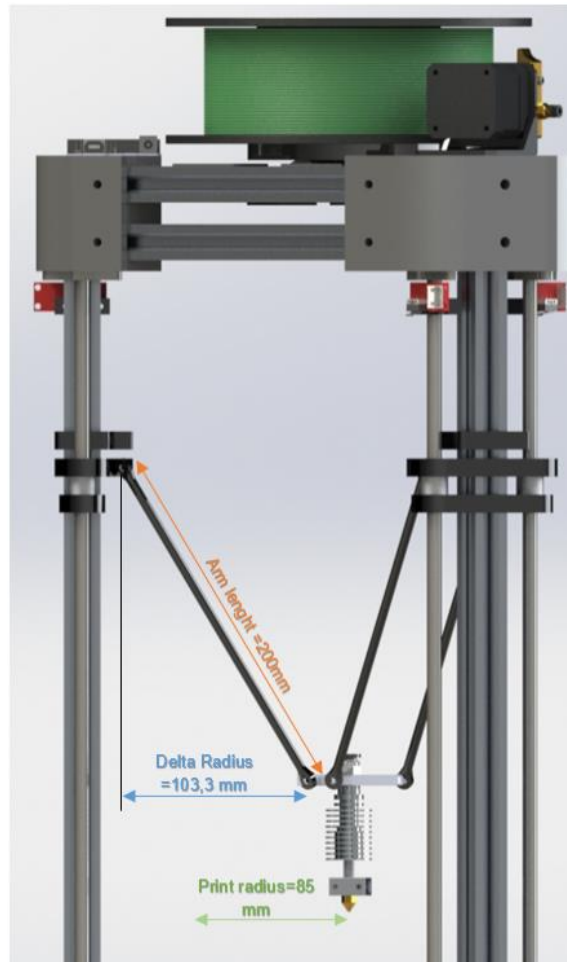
Relevant dimensions for internal calculation of printer kinematic
